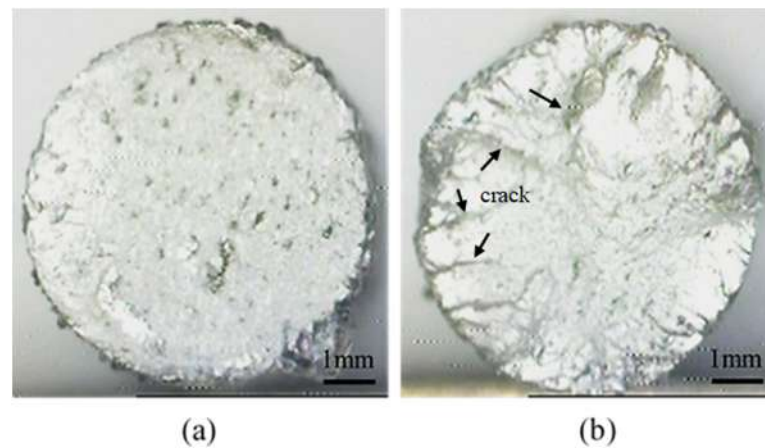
Macroview of the fatigue fracture of the Al-Ni-Cu alloy before and after solution treatment: (a) As-printed and (b) 530 °C for 1 h and 175 °C for 6 h specimen.
